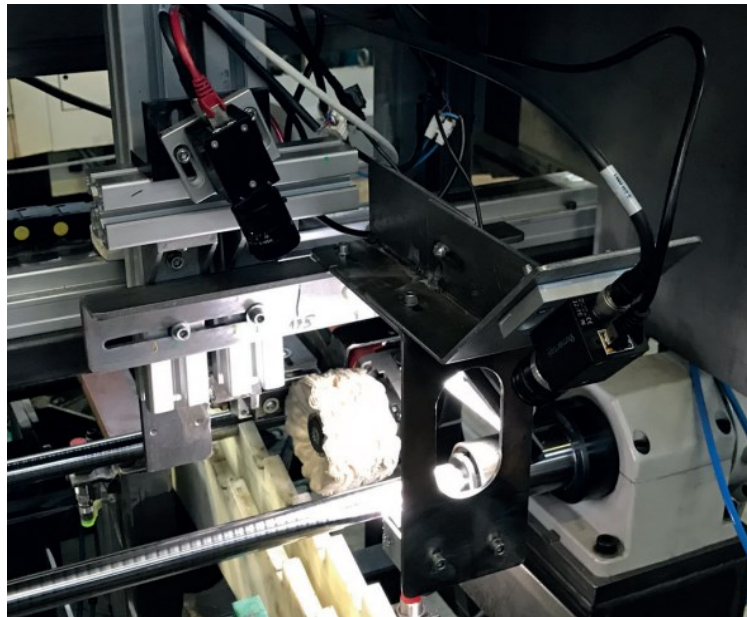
Example of a snapshot sensor integrated in the production line: it allows automated inspection of geometry and shape. Photo by Micro-Epsilon Messtechnik GmbH & Co. KG [28].
